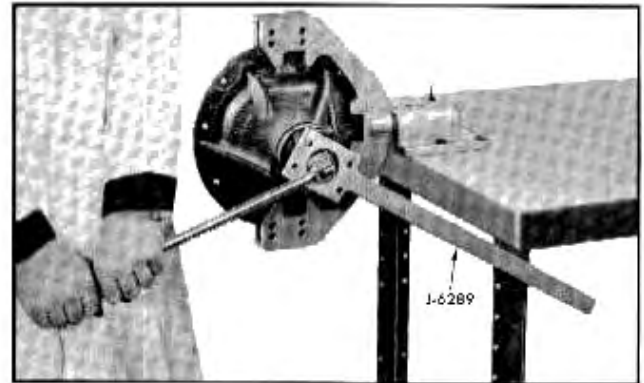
Holding Companion Flange With Holding Tool J-6289
